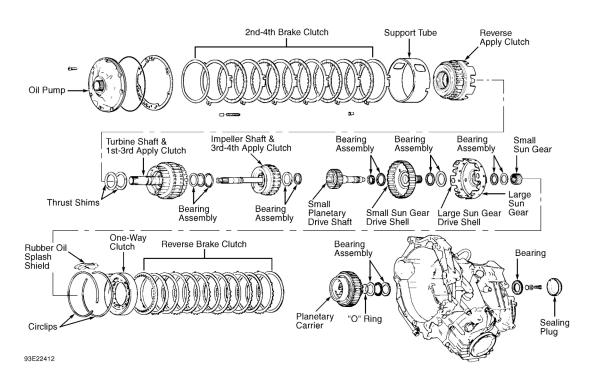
Exploded View Of A/T Components (097 Shown; 098 Is Similar) Courtesy of VOLKSWAGEN UNITED STATES, INC.
